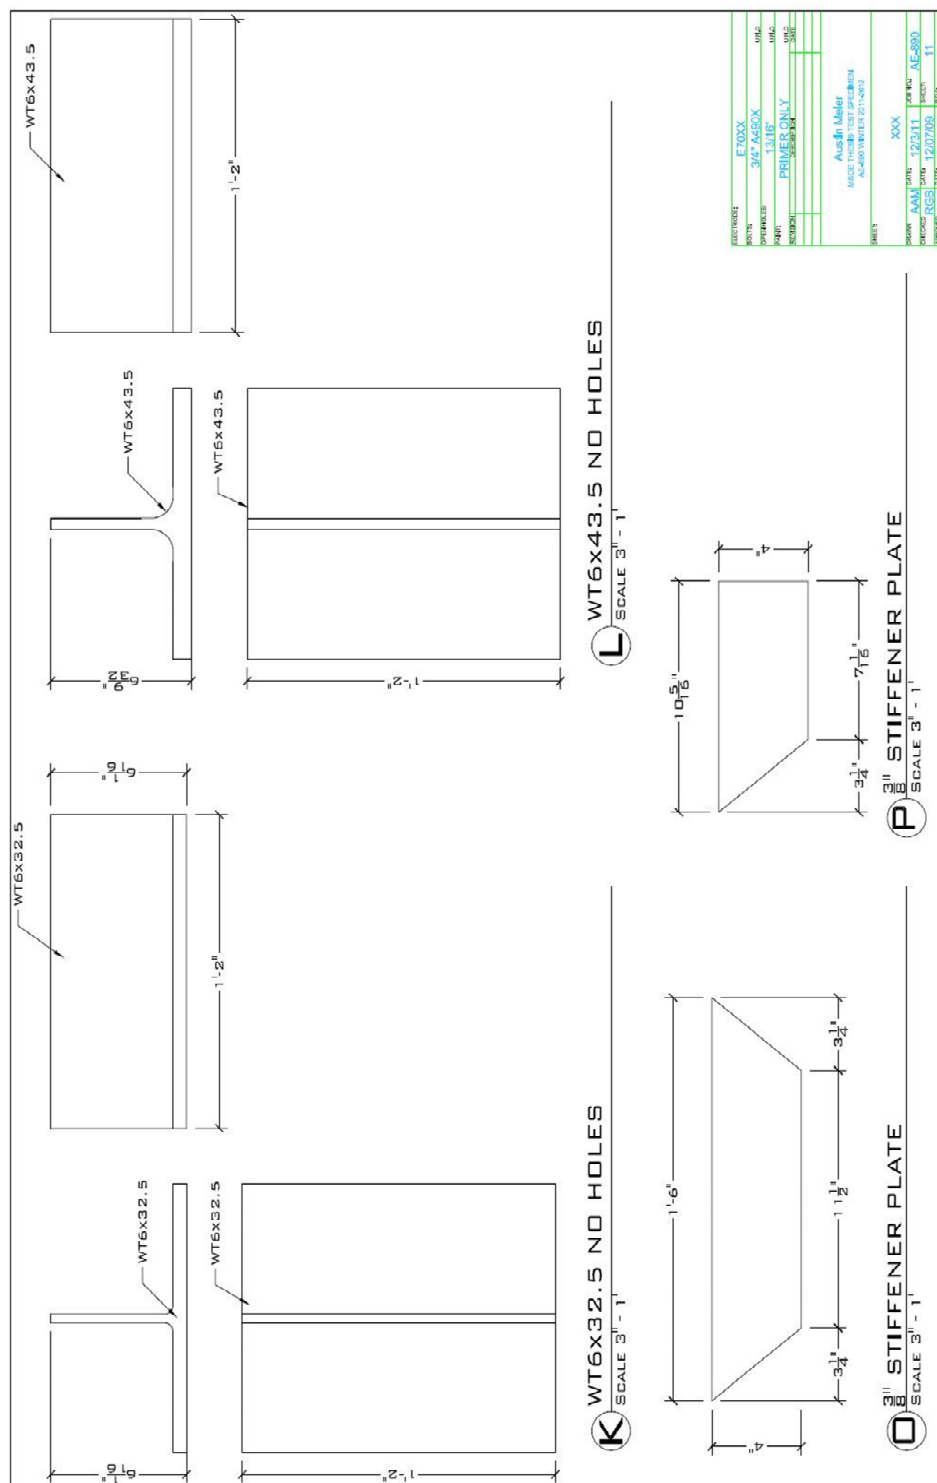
WT6x32.5 ASTM8 Test Specimens.
